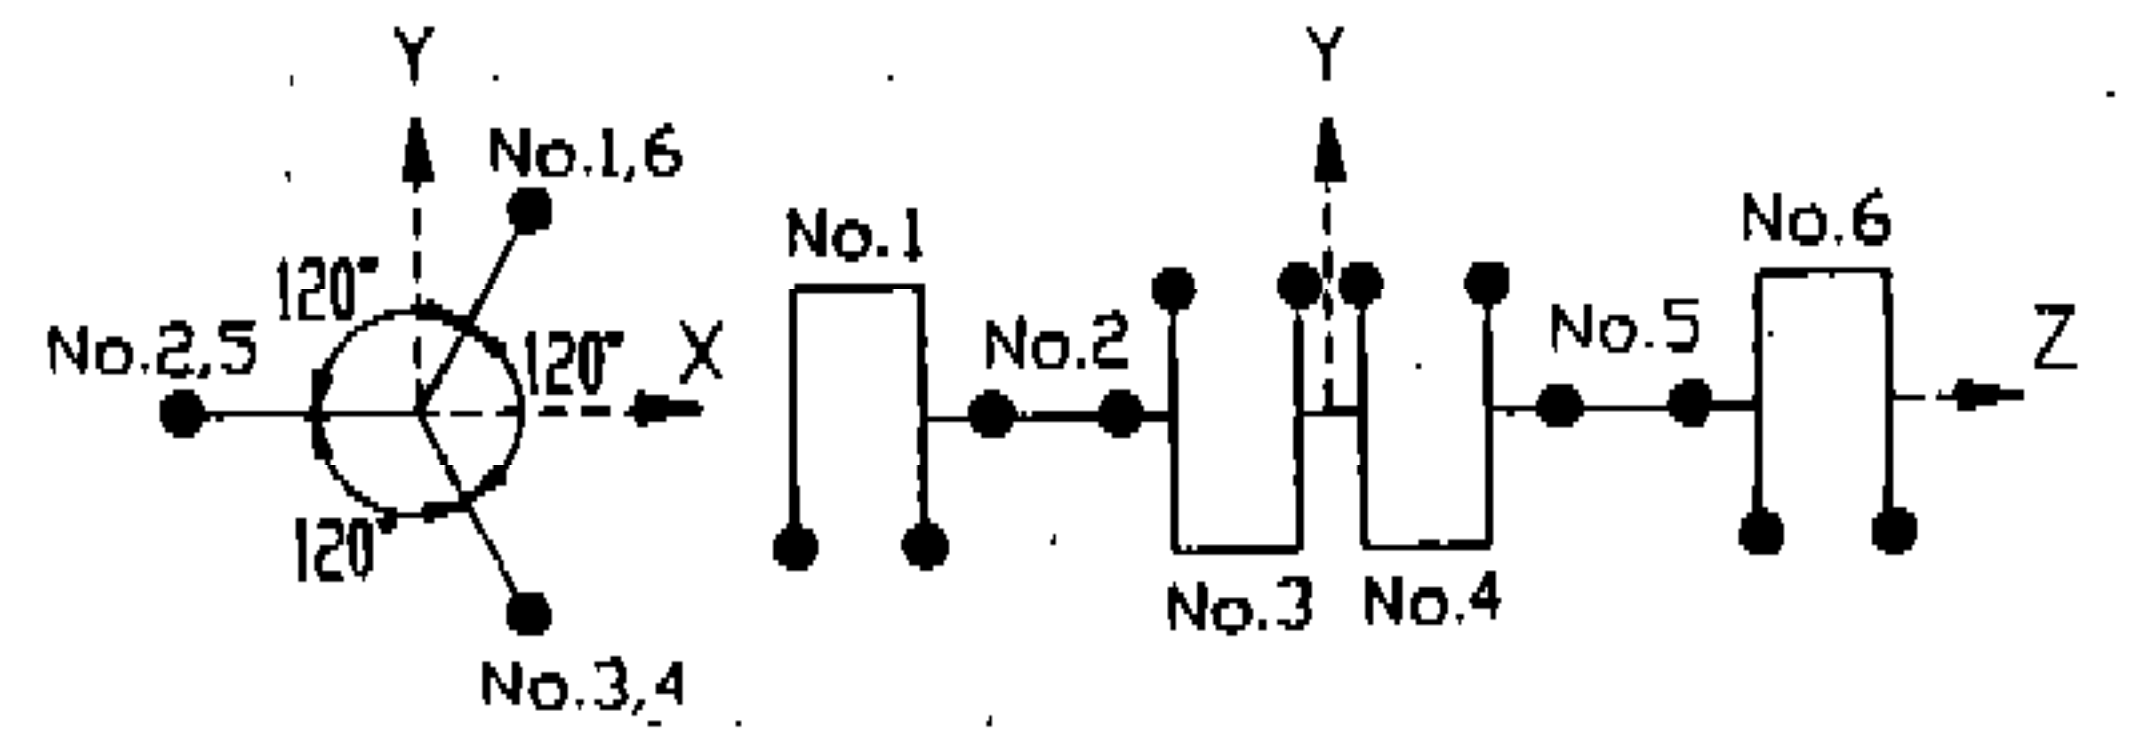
Diesel In-line 6-cylinder type in crankshaft
